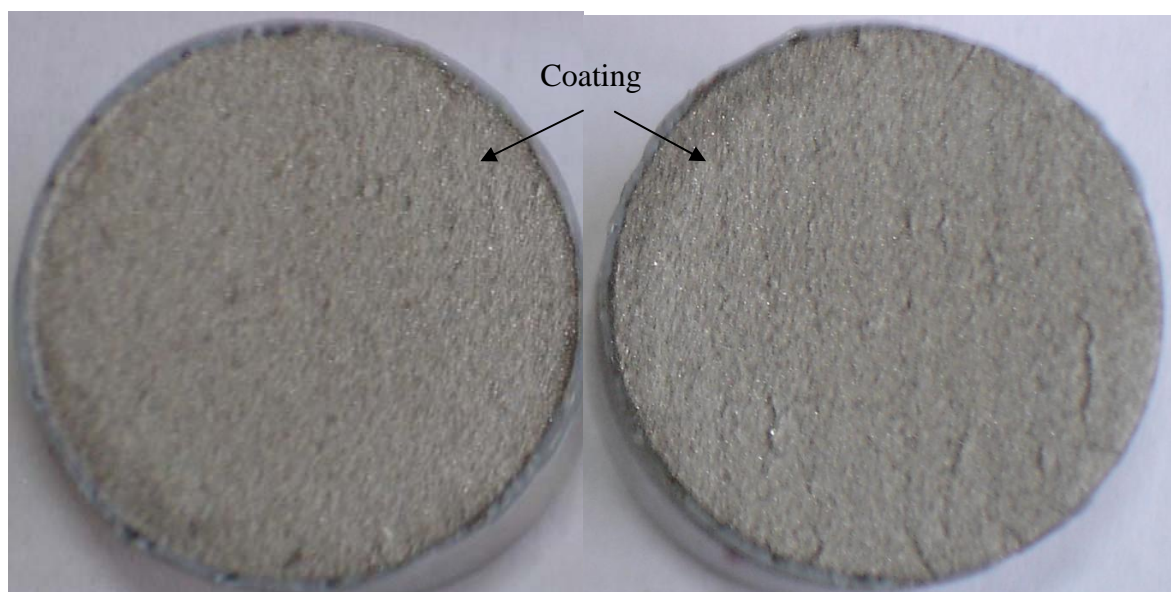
Top view of Ni-25 wt. % Ni coated BN (103 μm) coating surface after fracture showing cohesive failure within the coating
